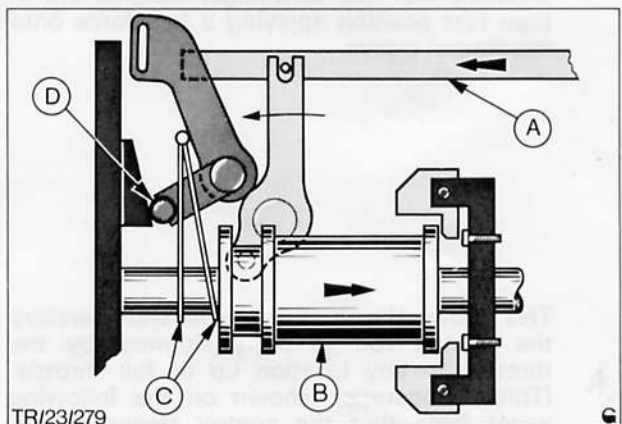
Throttle and governor assembly during full throttle with a low engine rpm
